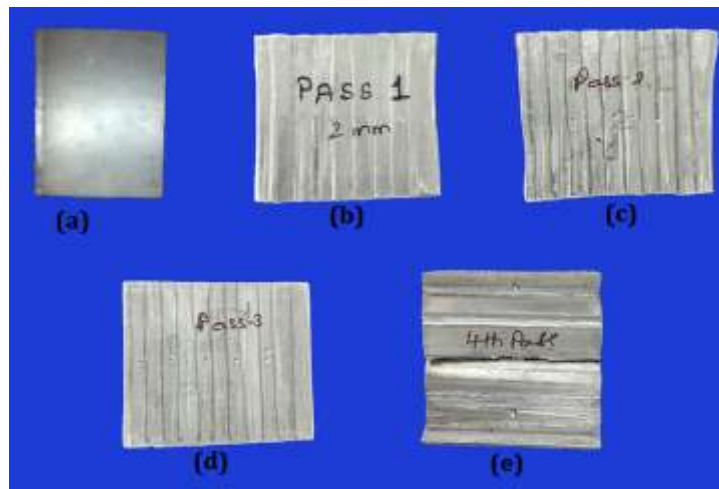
CCGP Specimens (a) As Cast, (b) 1st Passspecimens, (c) 2nd Pass (d) 3rd Pass and (e) 4th Pass Specimens
